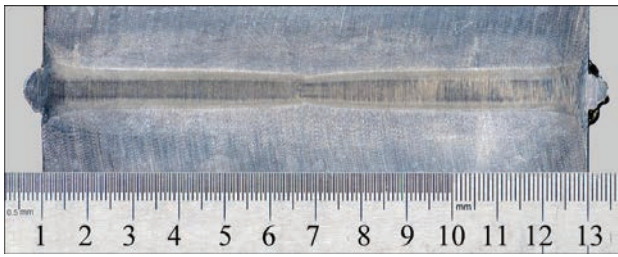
Macrosection with penetration by opposed welds of tail part of the blade package with a thickness of 120 mm
